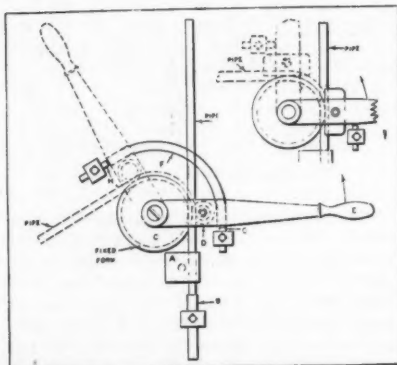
Pipe bending fixture having a fixed form and a rotating formed roll (detail view). Forming roll replaced by straight forming block.
